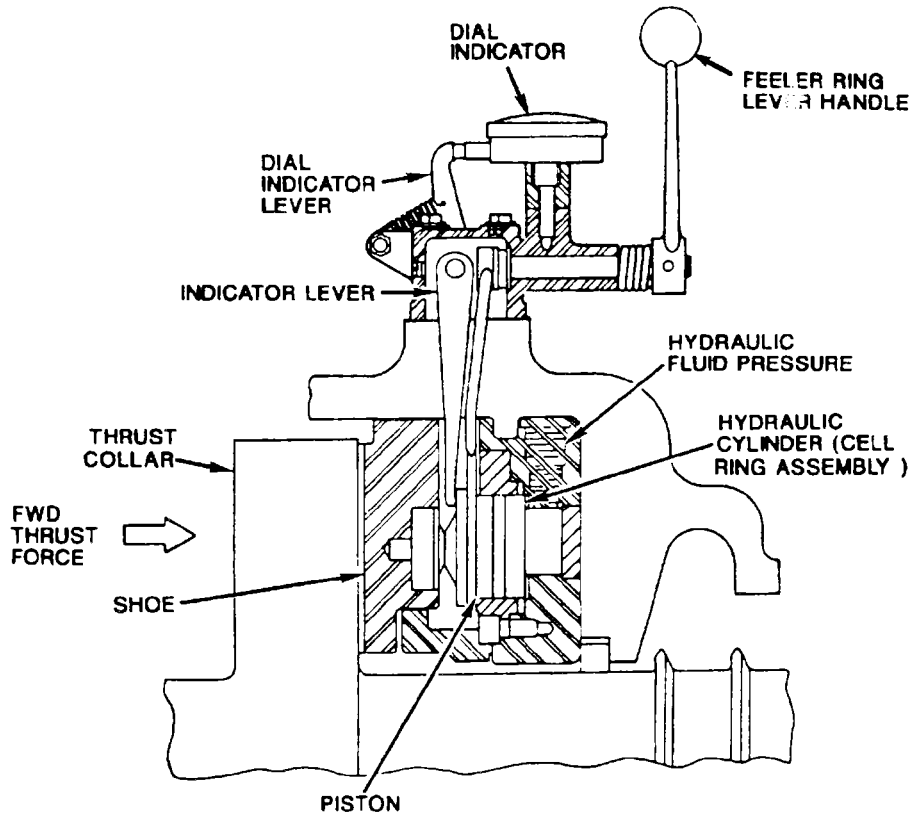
Feeler Mechanism Assembly (Kingsbury)
